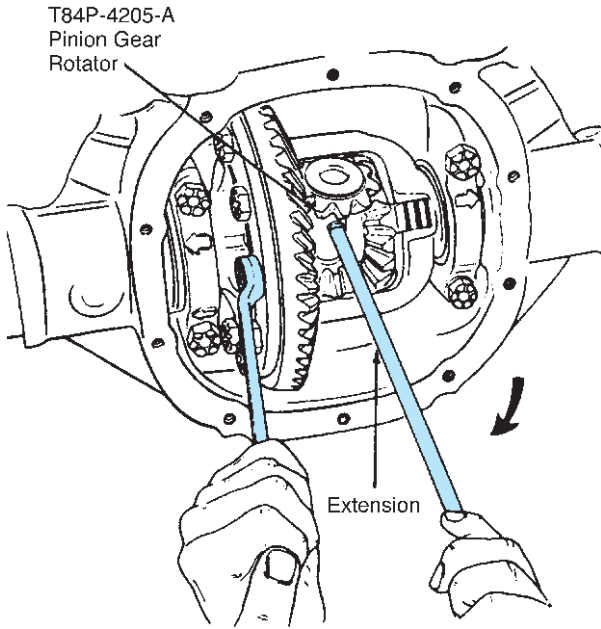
Because of the clutch pack preload, a rotator is needed to roll the pinion gears around to the differential case windows for removal. (Courtesy of Ford Motor Company)
